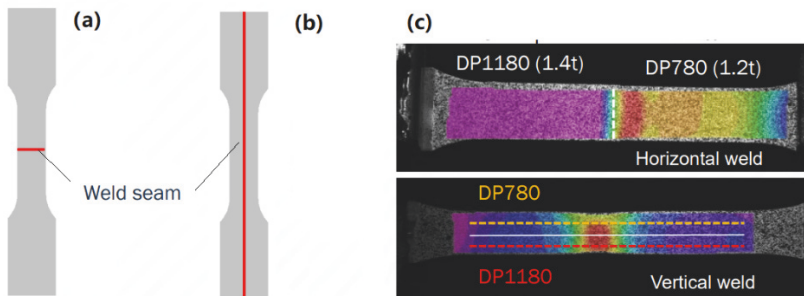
Tensile specimens of spliced plates: (a) weld perpendicular to the tensile direction; (b) weld parallel to the tensile direction; (c) strain states of two tensile specimens shown by DIC testing [6].
